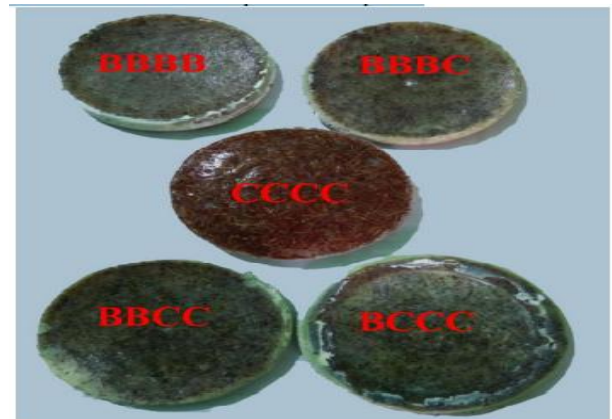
Fabricated composite samples Front and Back End for Wear Test
